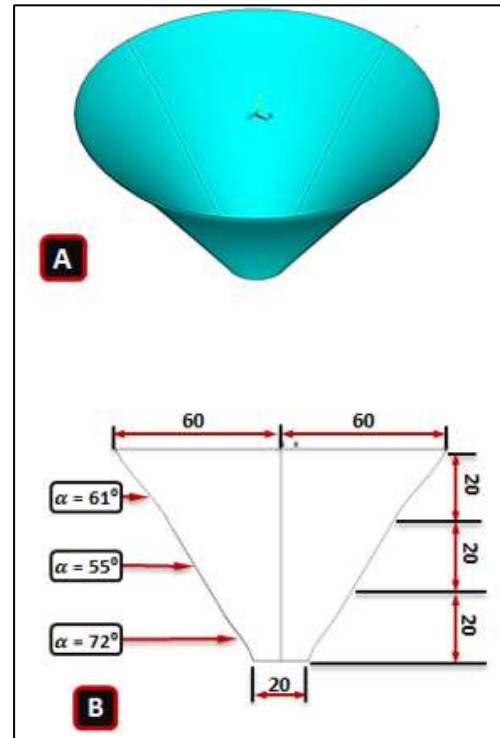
Dimensions details of the product that used (A) 3D CAD model (B) Side view
